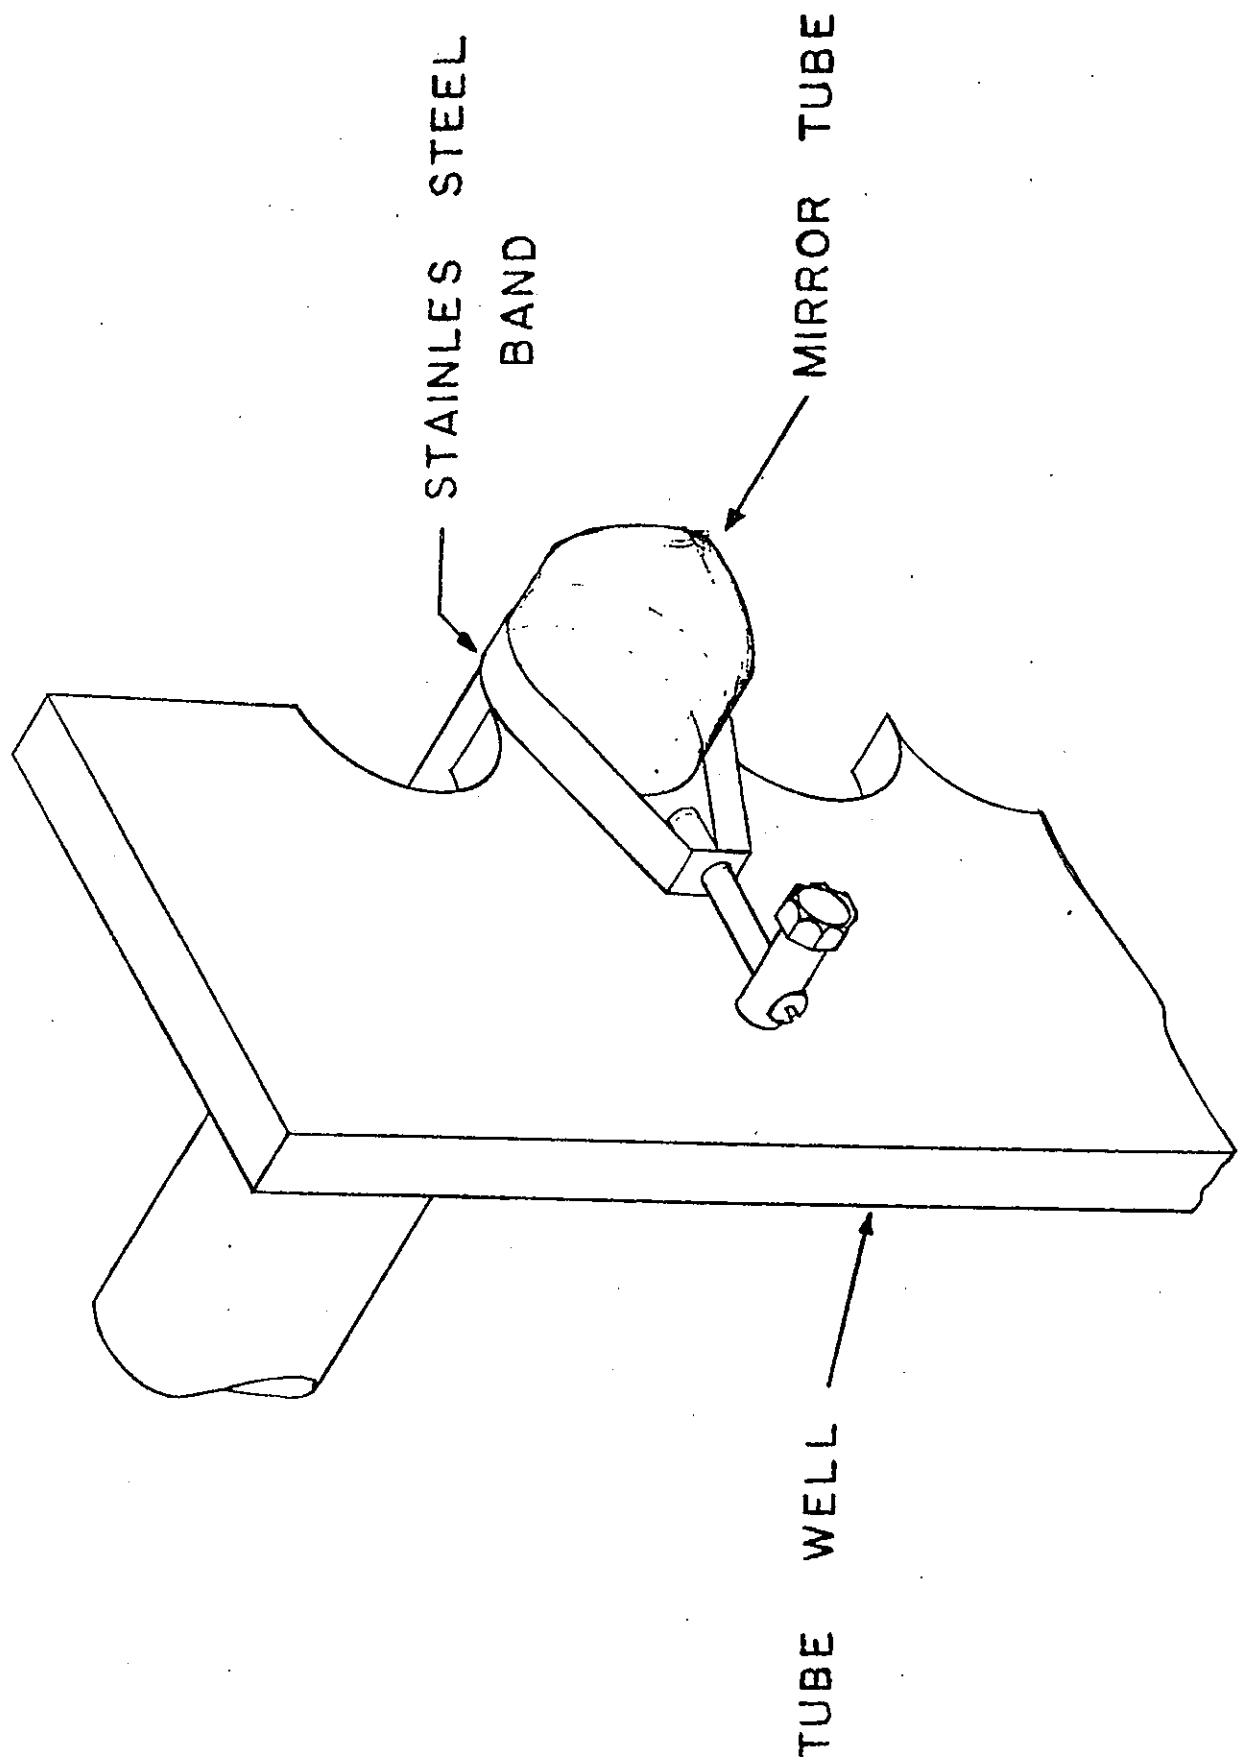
ATTACHMENT OF MIRROR TUBES TO TUBE WELL.
